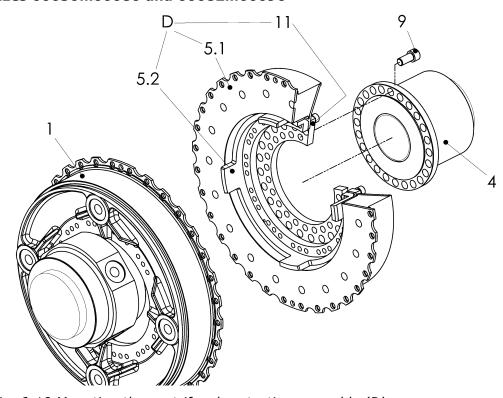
Mounting the centrifugal protection assembly (D)
